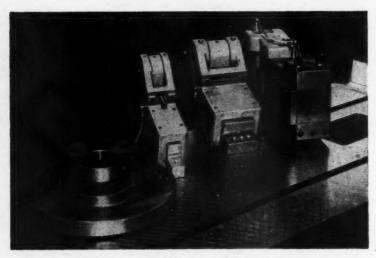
A split cam and carrier and three slides are here seen resting on the bed of a special No. 35 machine
